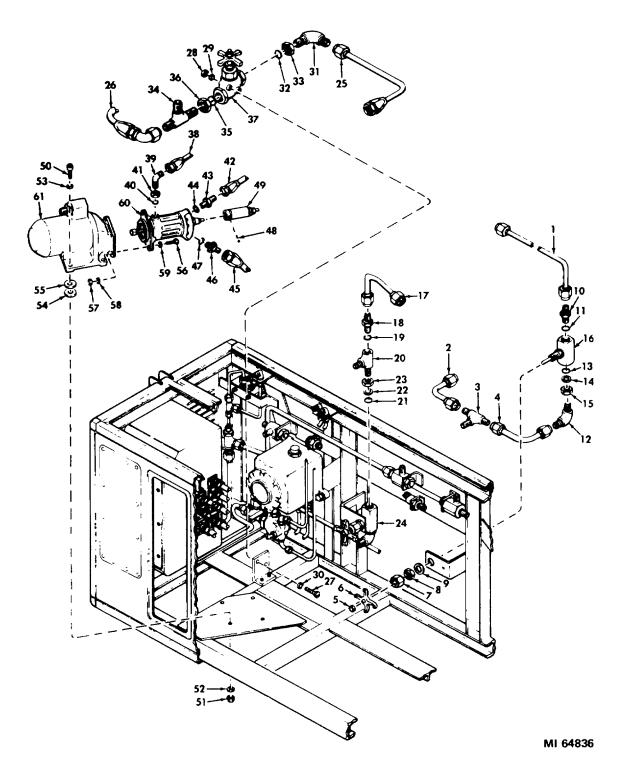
Components of the hydraulic test console lower section - partial exploded view (part III)
